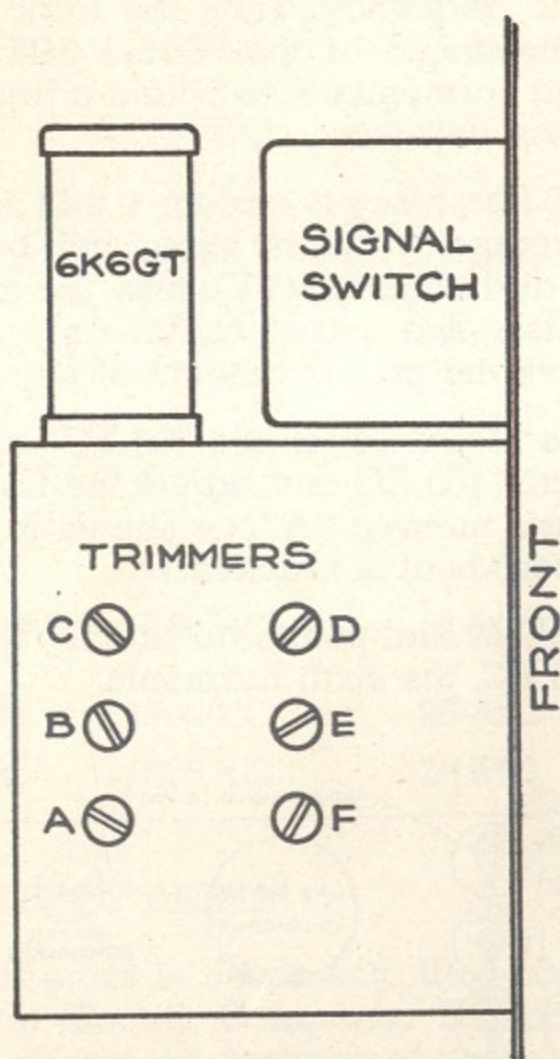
End View of Model 340 Chassis Showing Location of Trimmer Adjustments
